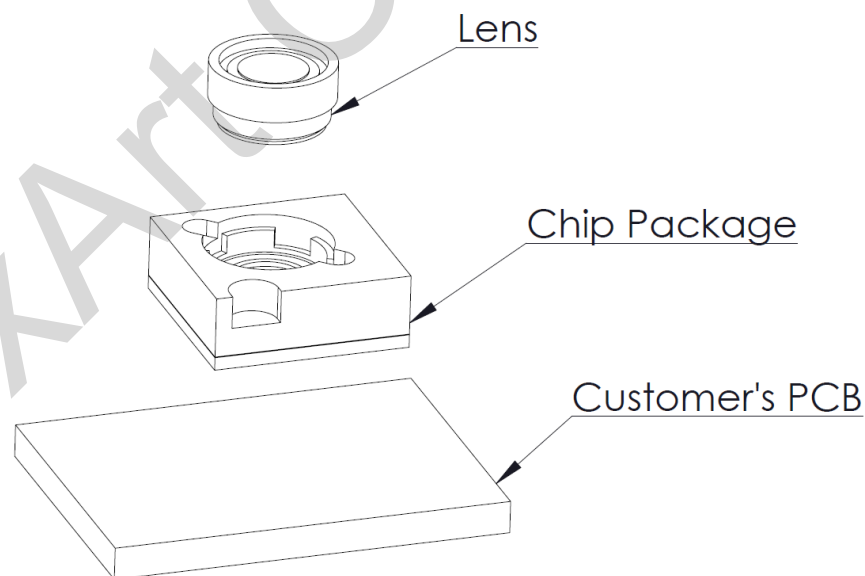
Exploded View of System Assembly (with L214-ZSZ)
